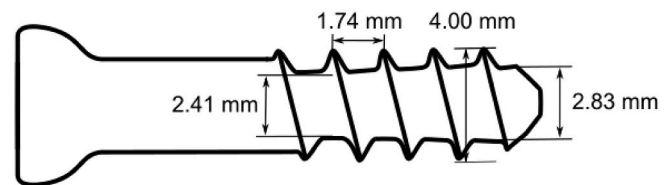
Dimensions of the aluminum screw used for the pullout tests.
